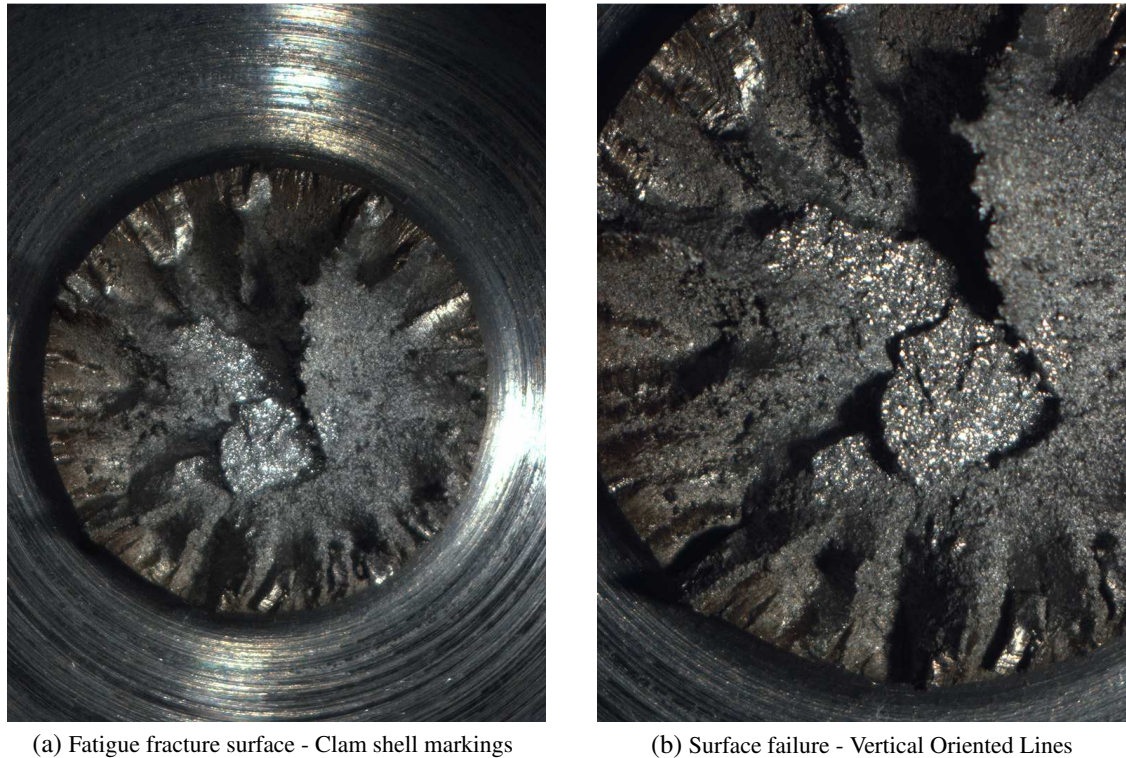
Fatigue Fracture Surface Appearance of Notched component
